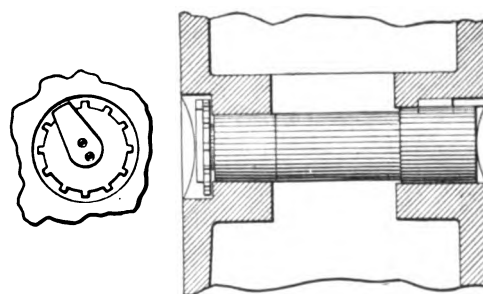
TYPE OF PIN FOR LARGE ENGINES
